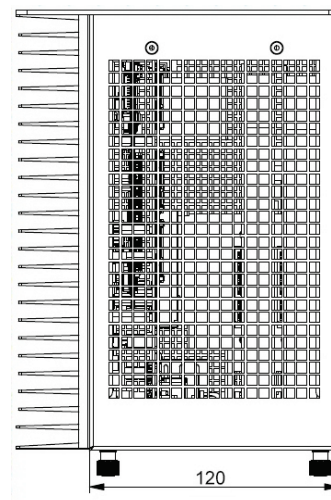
Dimensions: top side (KBox C-104-TGL-2)
